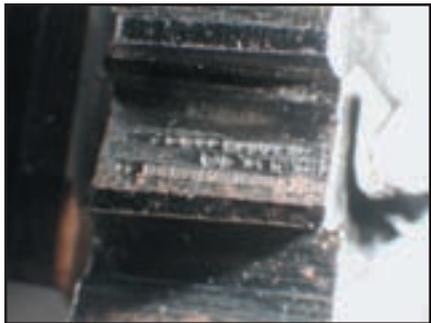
Gear tooth surface, post-shaping (Ref. 3).
